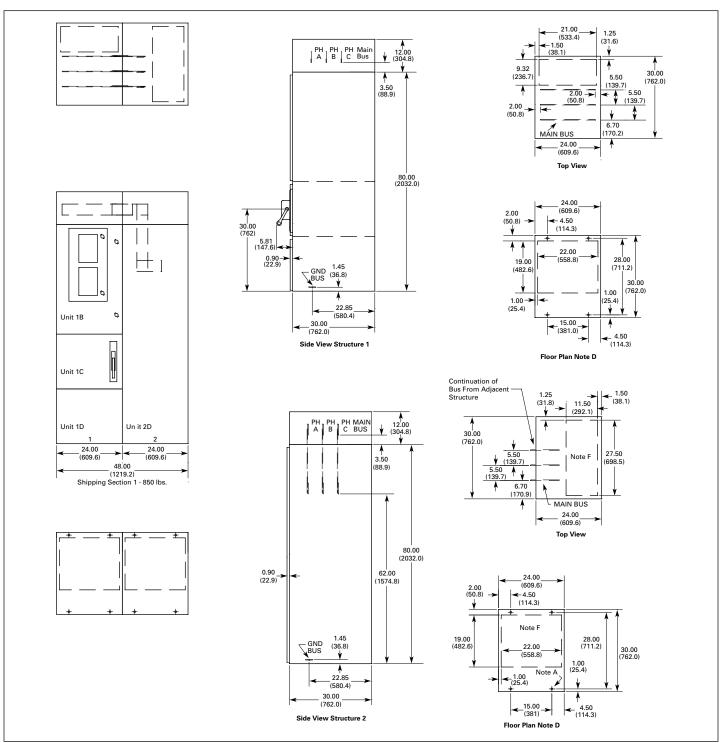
24.00-Inch (609.6 mm) Incoming Cable Section with 24.00-Inch (609.6 mm) Metering Section (for Right End of Lineup)—Dimensions in Inches (mm)
